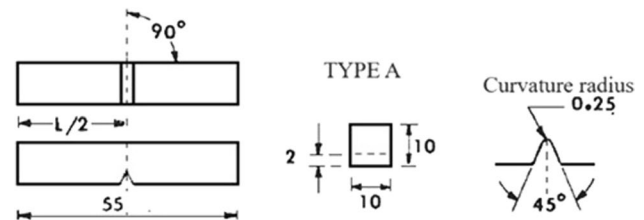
Geometry and dimensions are given in millimeters of the specimen used in the impact test
